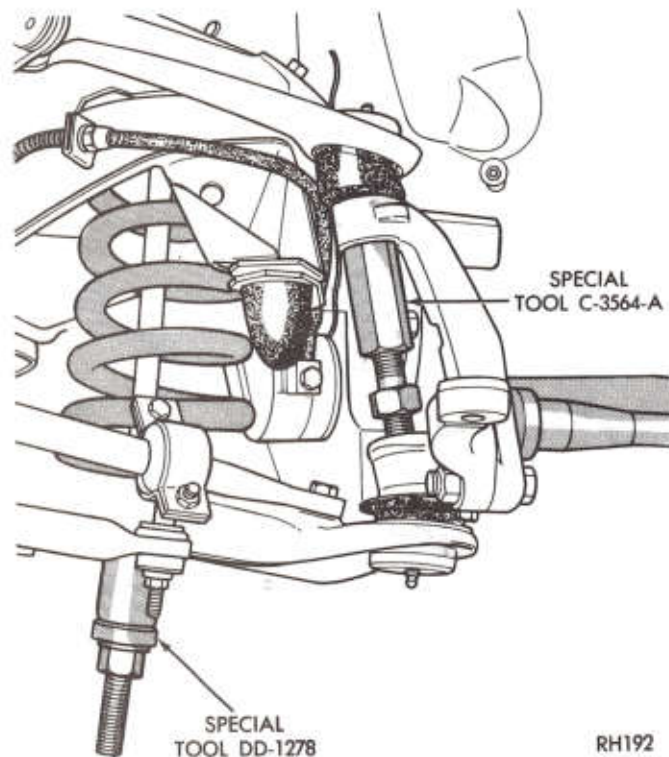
Ball Joint Breaker and Spring Compressor Tools Installed
